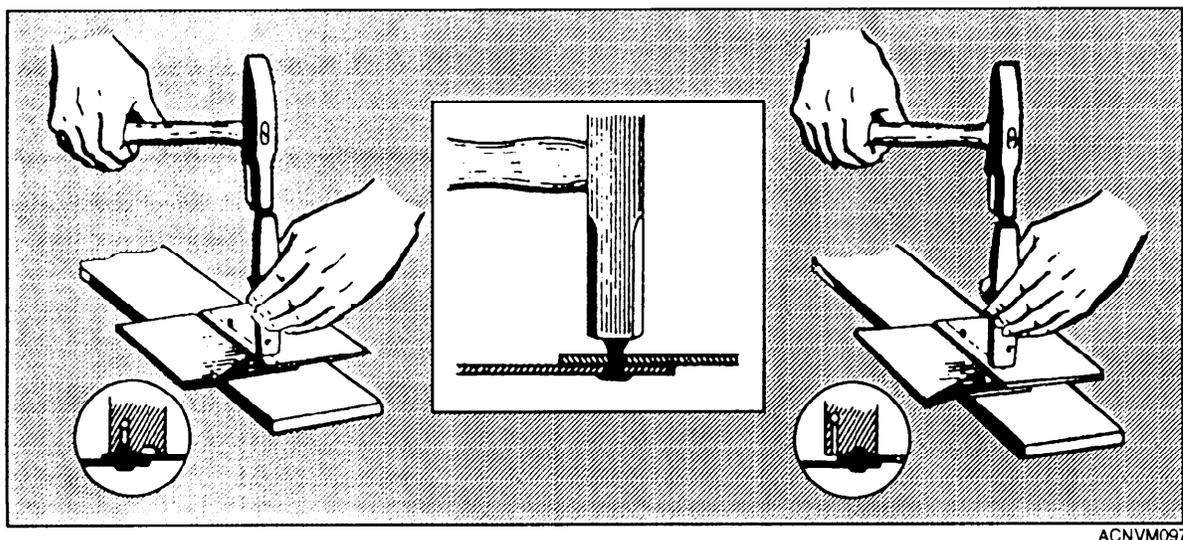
Drawing, upsetting, and heading a rivet.
